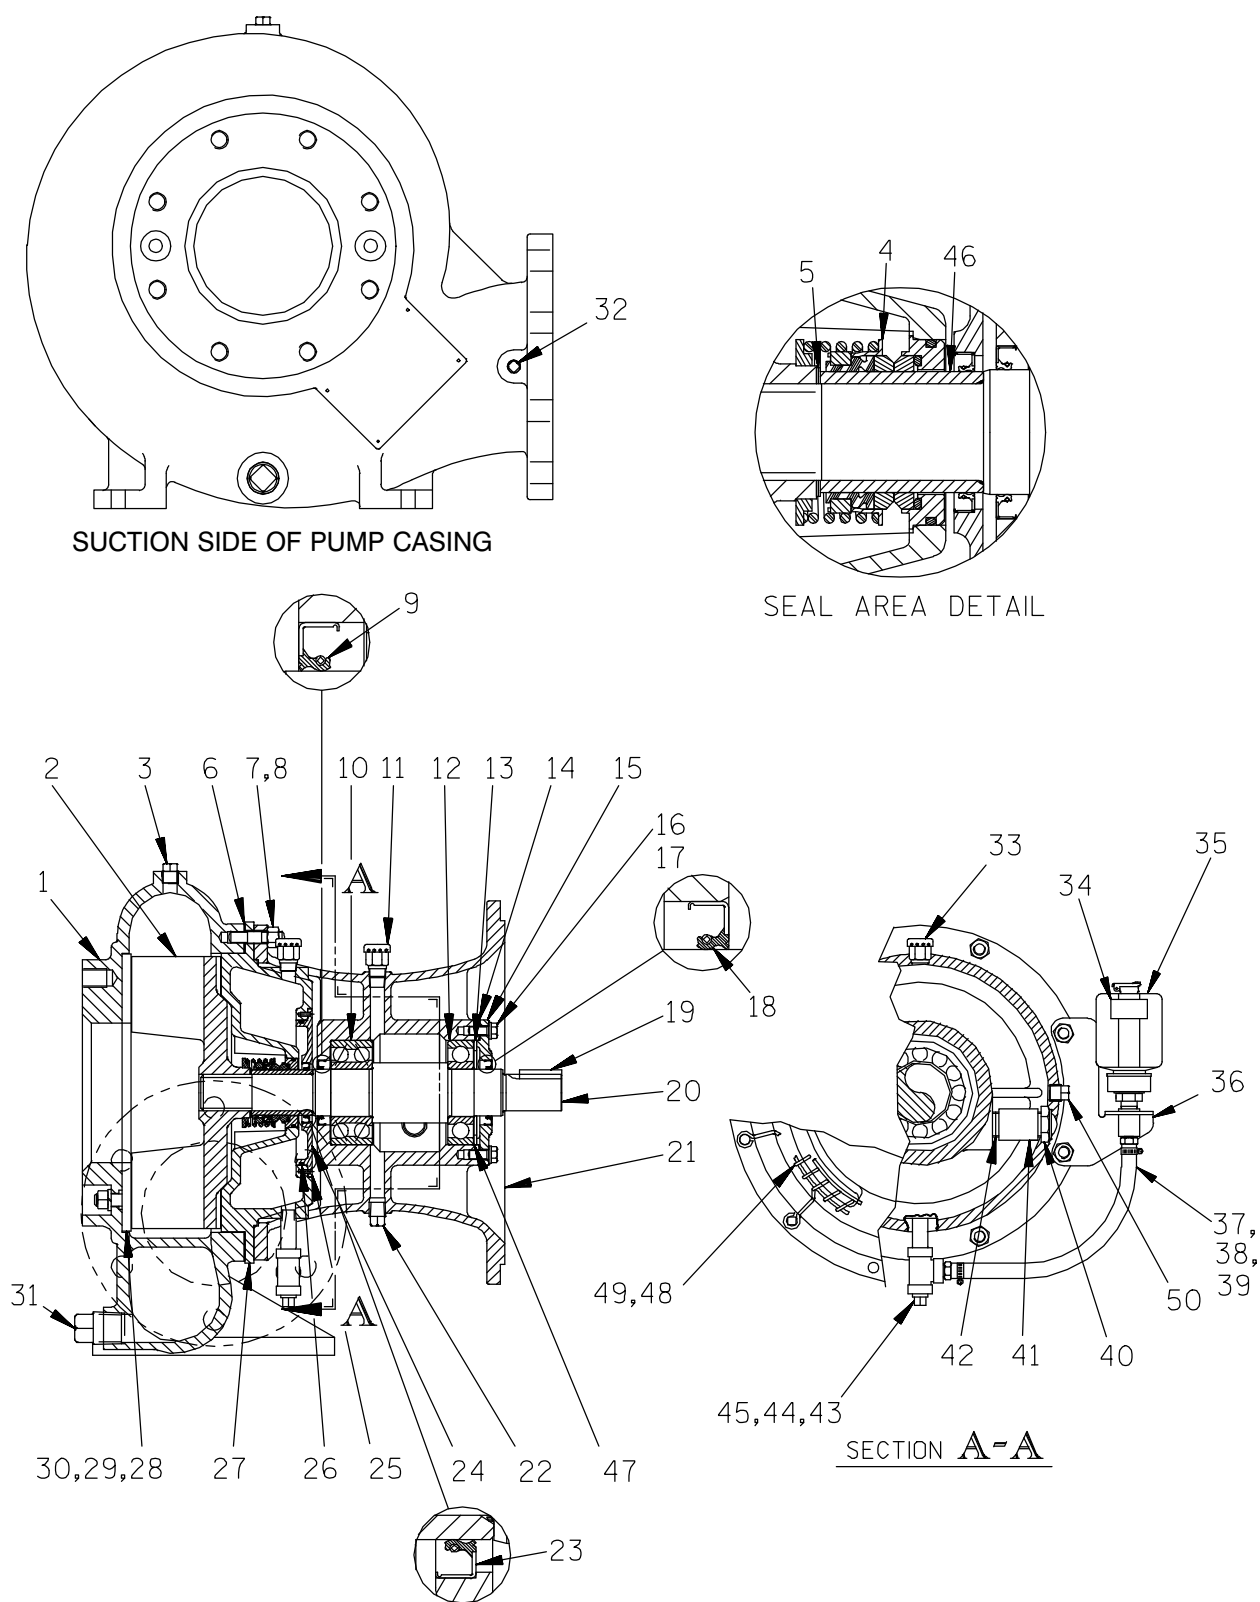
66E60—(SAE 4/10) Pump End Assembly
